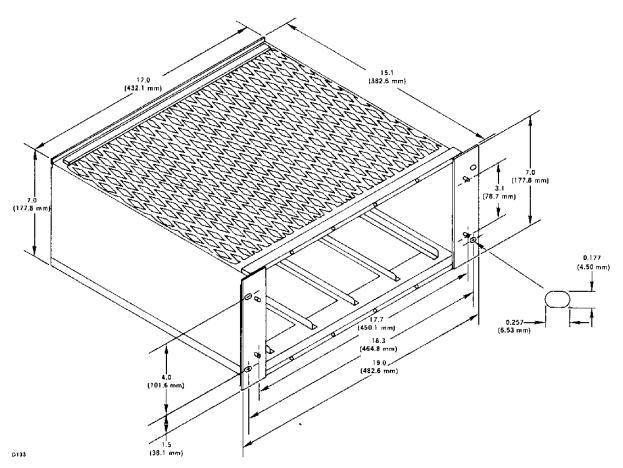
Mounting Dimensions of the Optional Q4001A Mounting Cage in Inches (mm)
